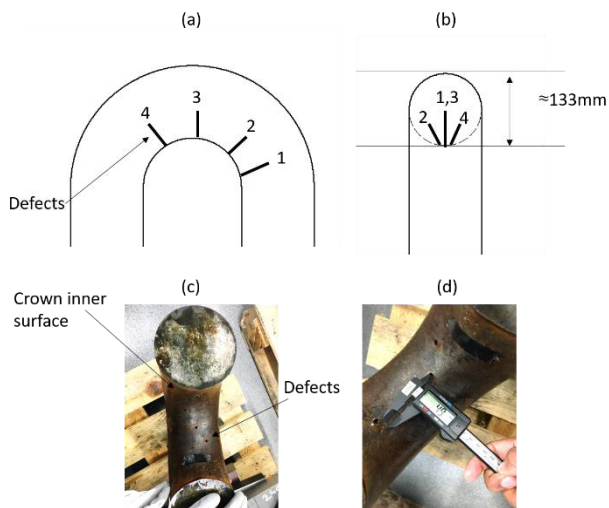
(a) Drilled hole defects in chain crown (side view). (b) Drilled hole defects in chain crown (cross-sectional view). (c) Defects image. (d) Defect hole diameter (sample).
